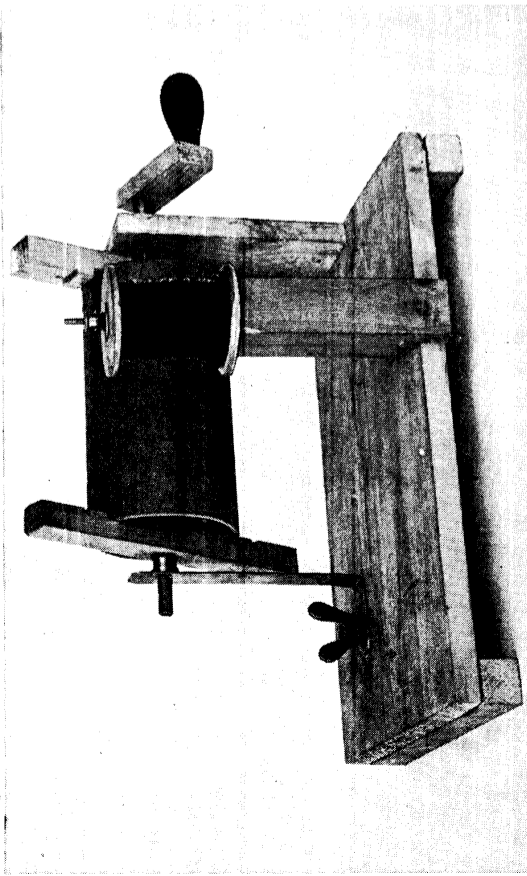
Improved type of adjustable winder. Grooves cut in the supporting pieces take various sizes of formers
